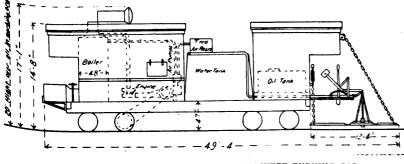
ARRANGEMENT OF MACHINRY IN WEED-BURNING CAR.
